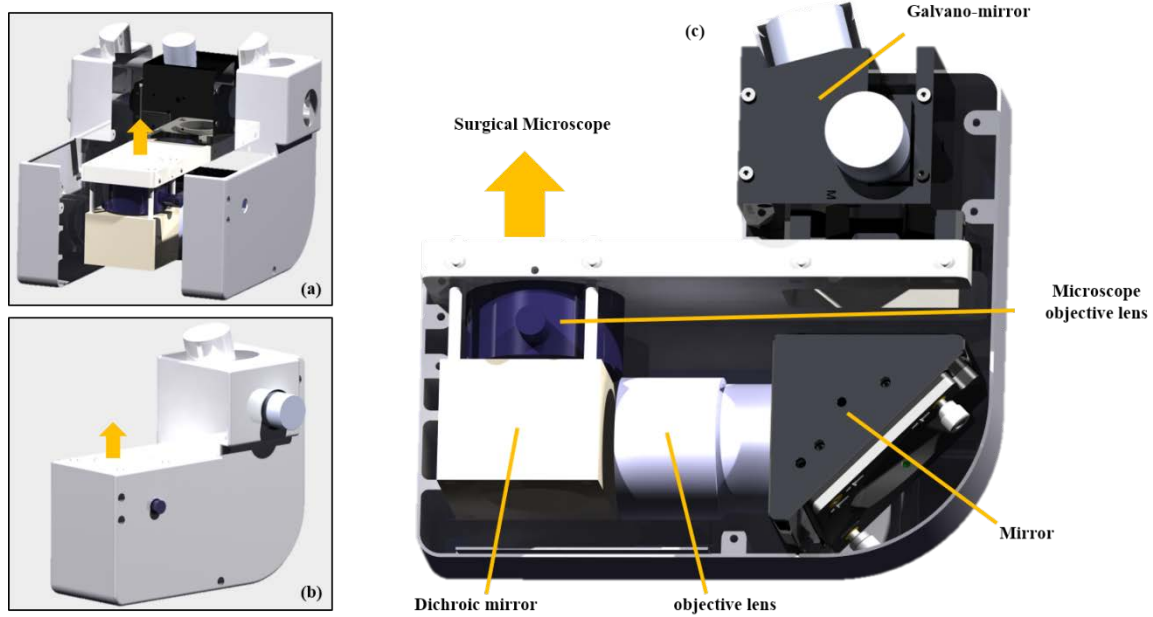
Schematics of 3D CAD design for OCT sample arm with the surgical microscope. (a) 3D model drawings of the hardware components. (b) Assembled design. (c) Schematic of the optical components in the hardware. Optical part consisting of the galvano-mirror, surgical microscope, microscope objective lens, mirror, objective lens, dichroic mirror are designed to attached to the surgical microscope system.
